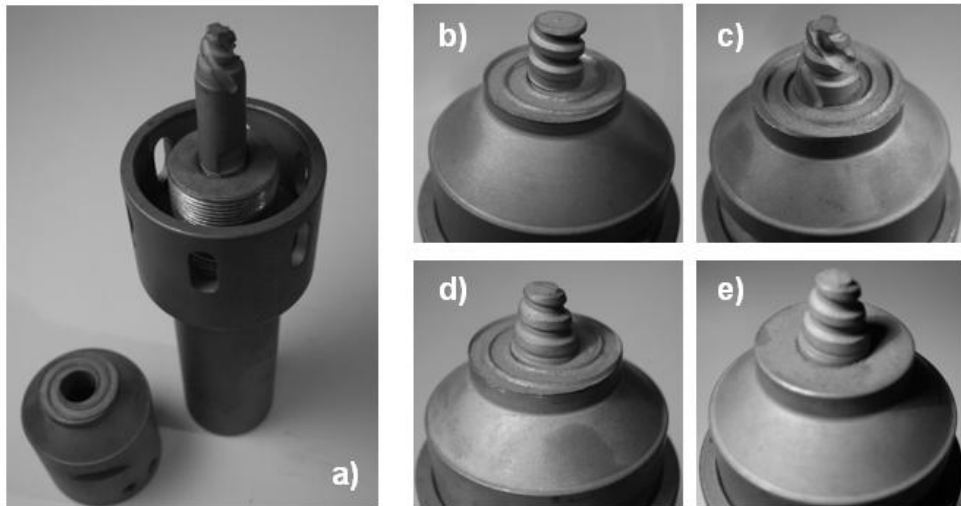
iSTIRtool_v3 tool version assembly. Pin and shoulder fastening (A) and several tool geometry combinations (B-E).
